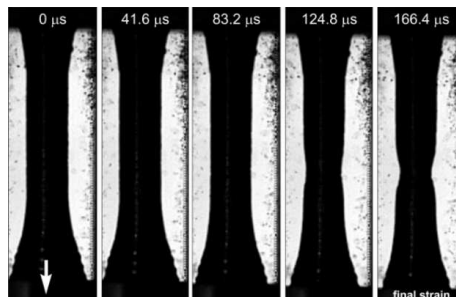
The history of deformation without fracture for an armor steel specimen tested with the use of SHPB technique with a shoulder (the specimen dimensions: diameter – 3 mm, gage length – 9 mm).
